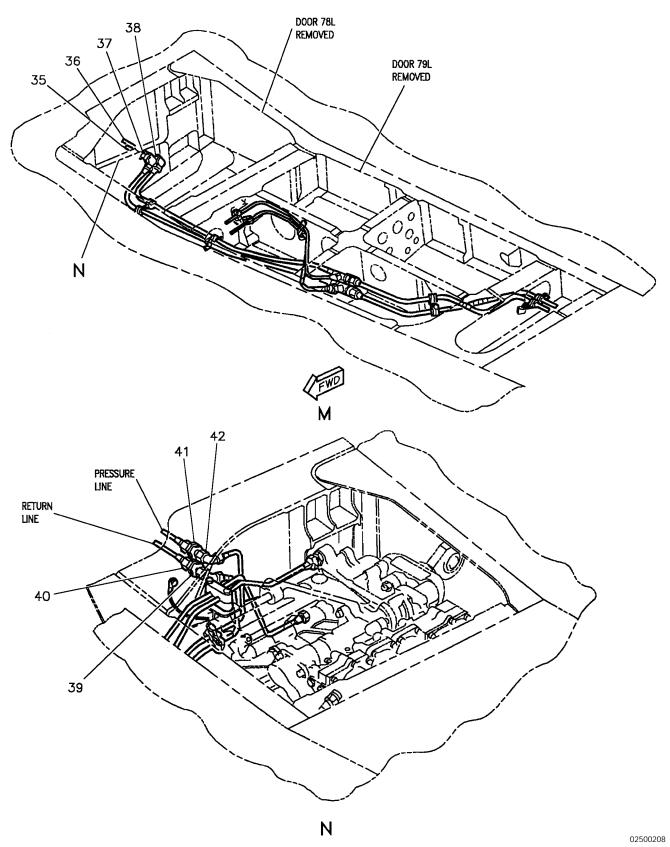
Inner Wing Removal and Installation Attachments (Sheet 8)
